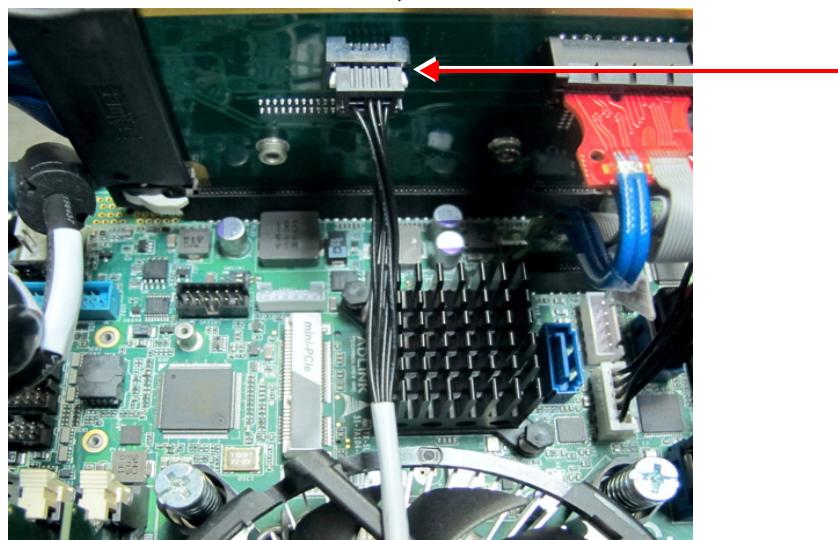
Removing BIB Board - Disconnecting BIB TO BE SPLIT CABLE Connector
